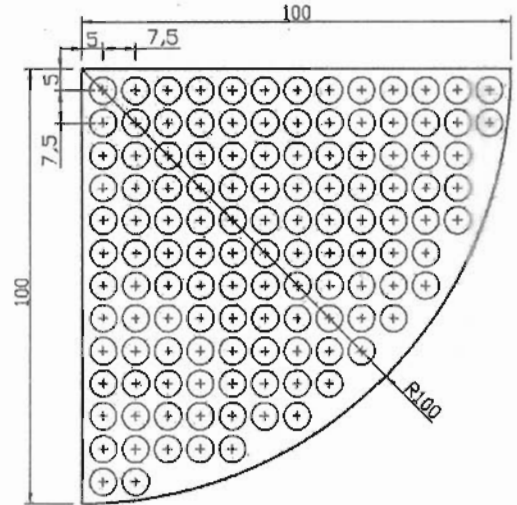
d. Elbow-bend heat exchanger No. (IV), 125 tubes, (In-line arrangement).
